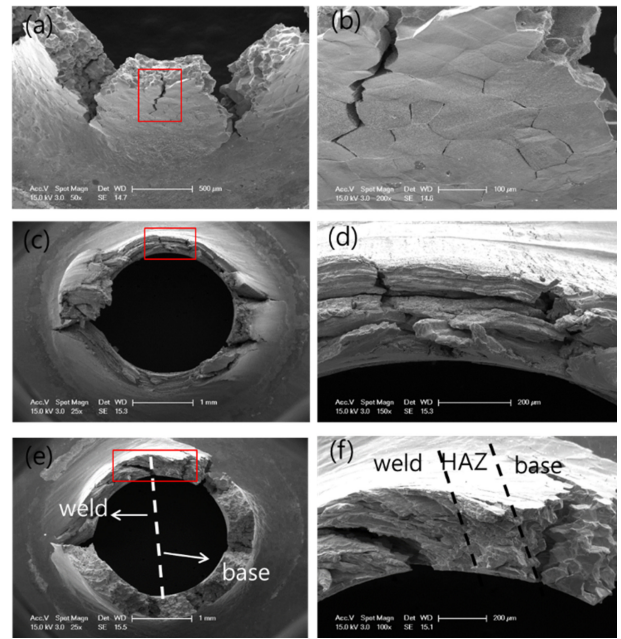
Bottom fracture surface of SP creep rupture specimen (a) Base metal (c) Weld metal (e) HAZ at 392 N (T = 700°C)
